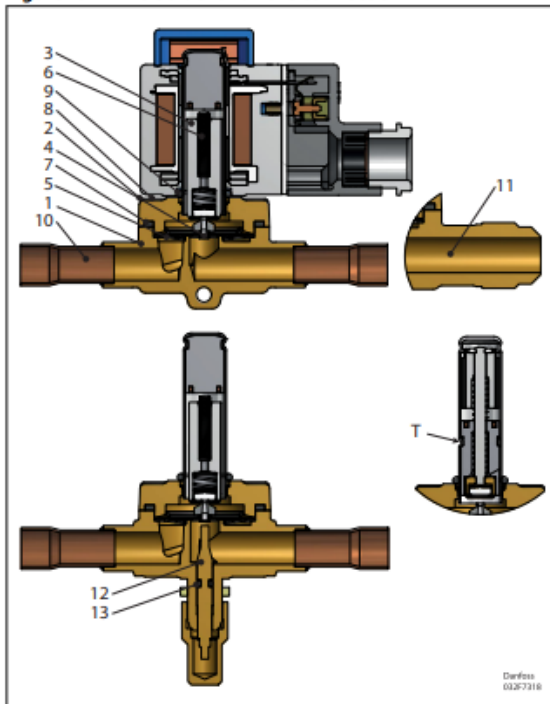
EVR 15 - EVR 18 Solder, flare, and flange
